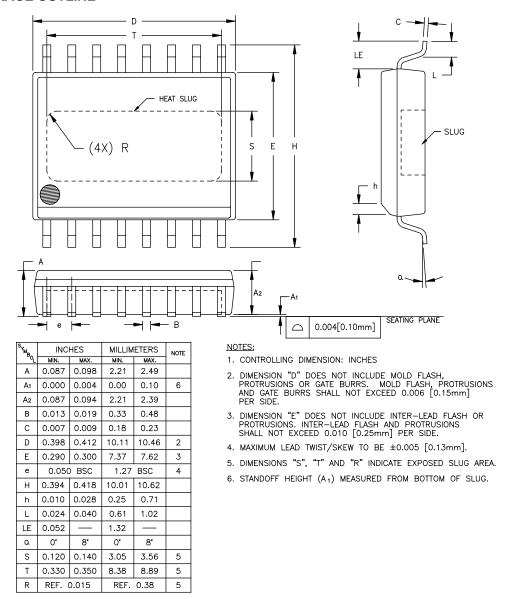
Package Outline - 16 Pin Wide Body SOIC with Heat Slug
